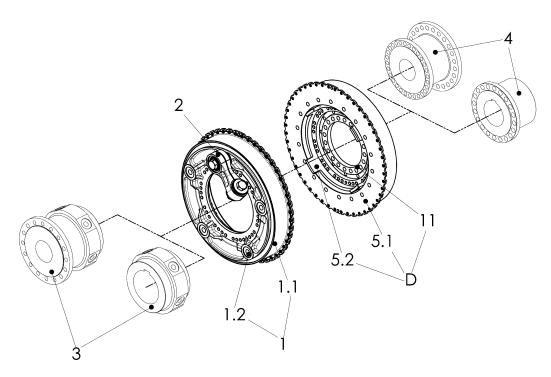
Example: 016L-00050...00080 and 00082...00090-..20
